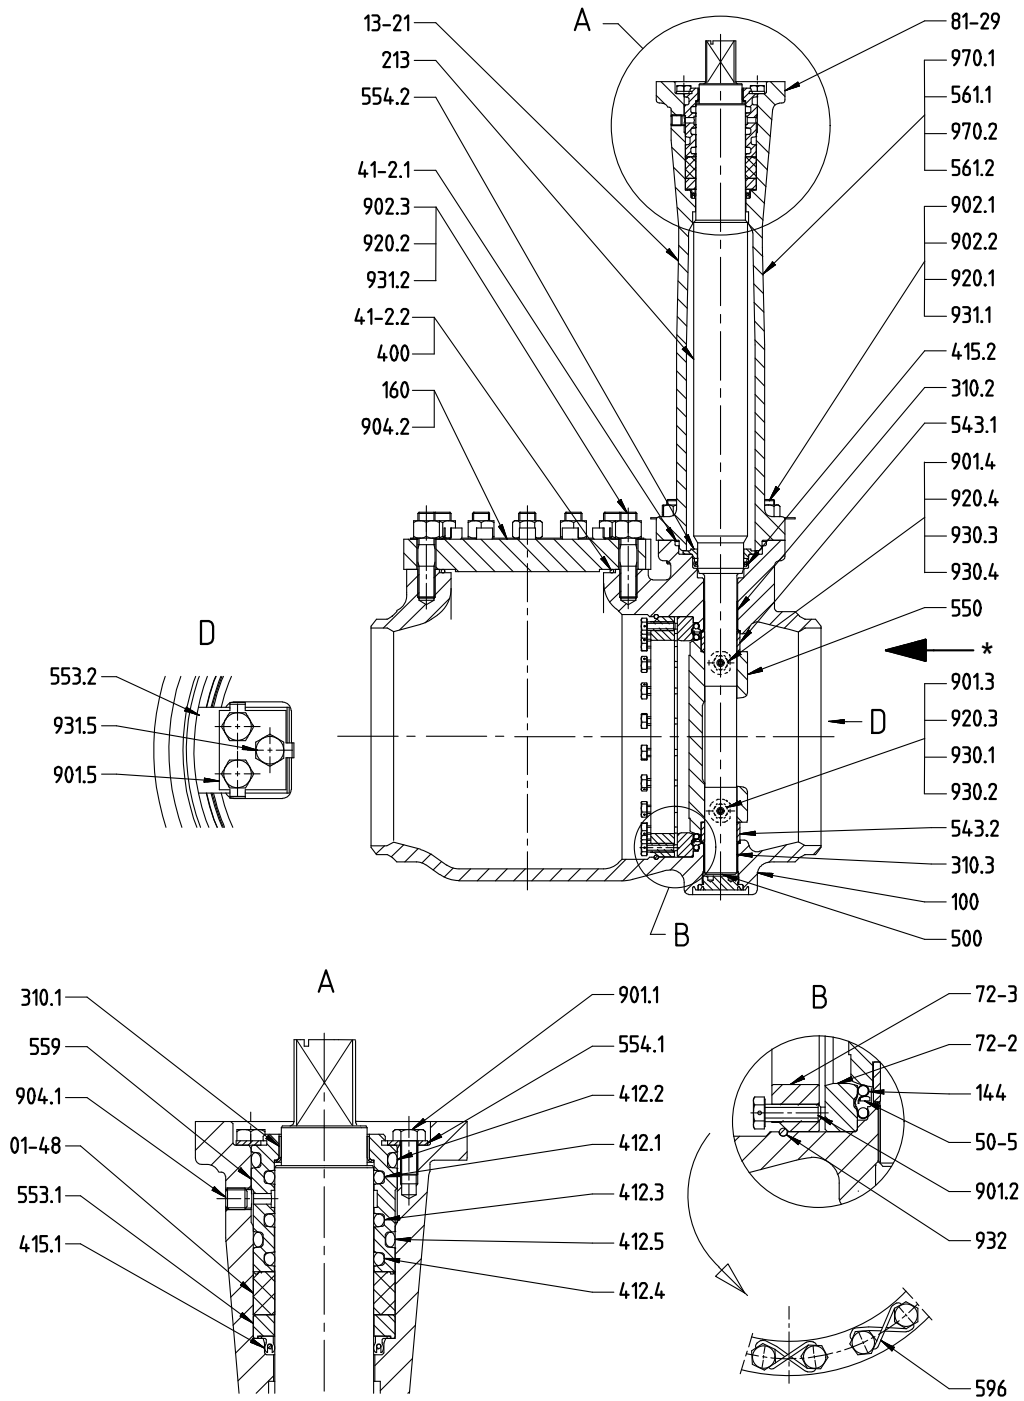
Sectional drawing of DANAIS CRYO BW - DN 200-250 (8-10 in.)
